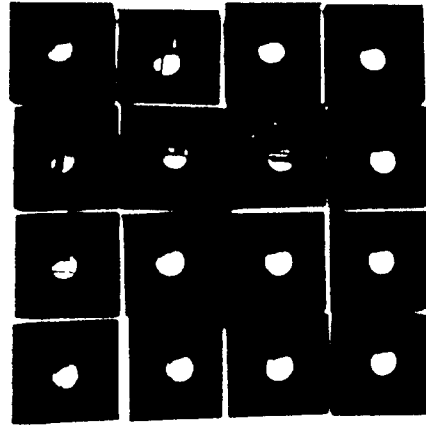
Photograph of the drilled specimen (Type-D drill)
